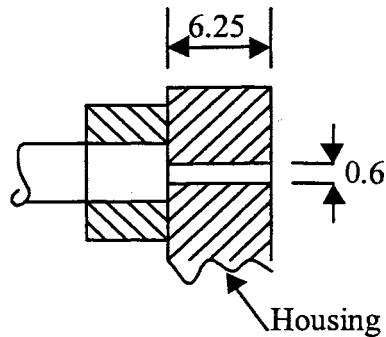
Pressure hole details in side wall of the housing (dimensions are in mm)
